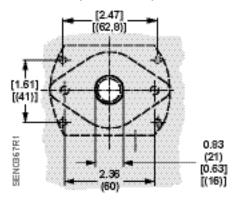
Drilling Template with [without] Mounting Flange in Inches (Millimeters).
